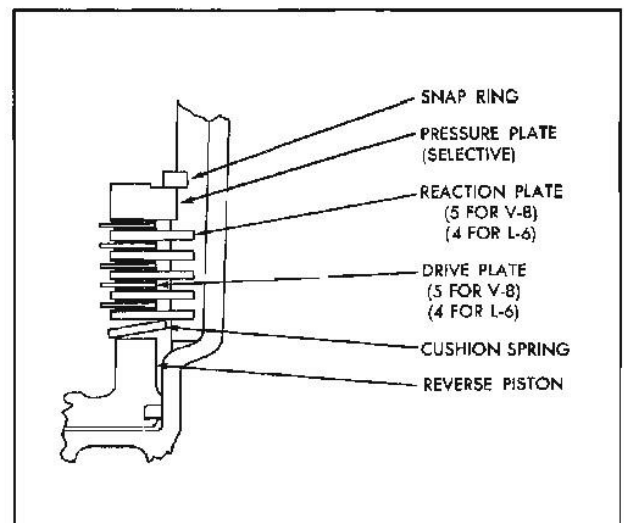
B-121 Reverse Clutch Pack Assembly Sequence
